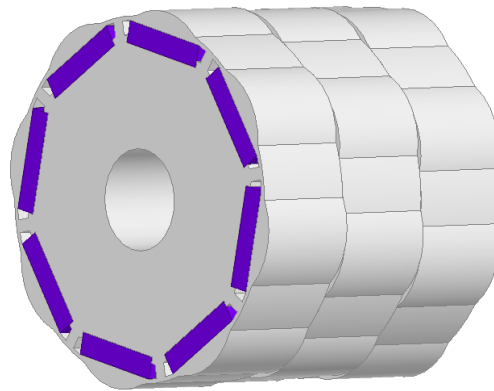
Step-skewing method in IPM machines [ZHU12].
